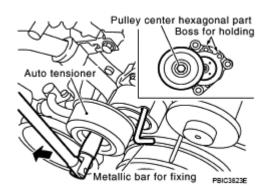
Holding Hexagonal Part In Pulley Center Of Auto Tensioner
